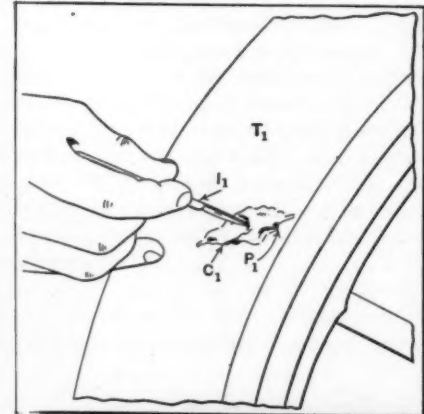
Stuffing Para gum into a cut in a casing, first cutting the gum into thin strips
